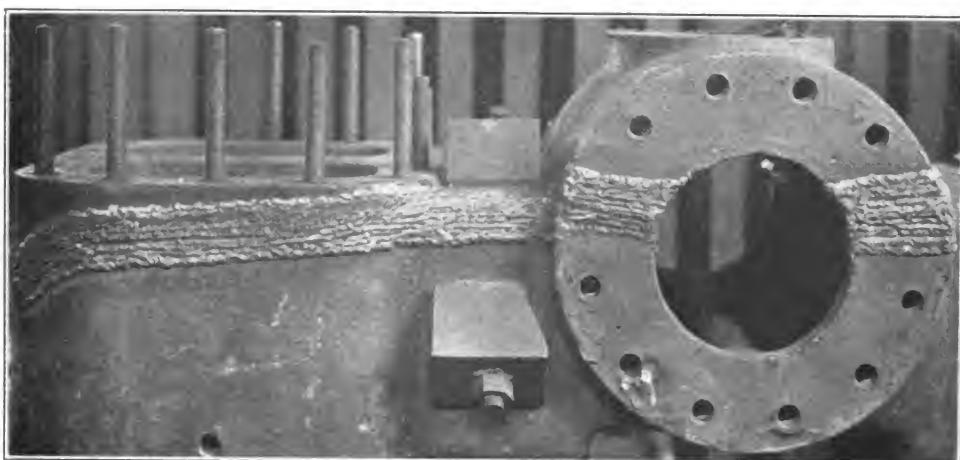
The broken pump surface as welded with bare electrode, and showing how the new material was built into place
